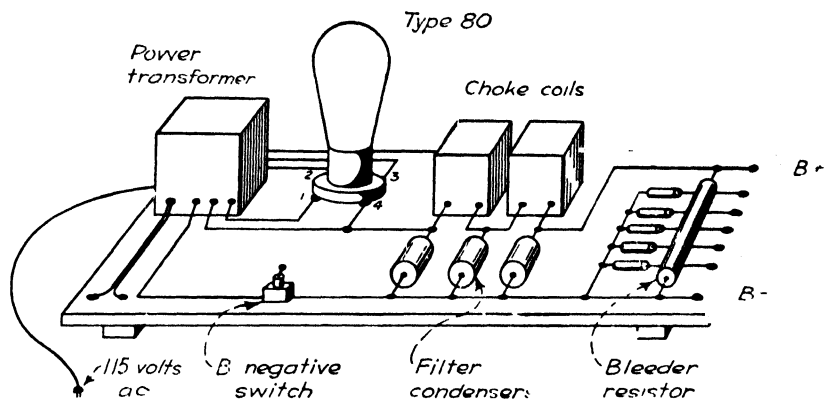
The position of the parts on the power-supply board. Note a 5Y3 tube can be used but it will require an octal socket in place of the four-prong socket shown here.
